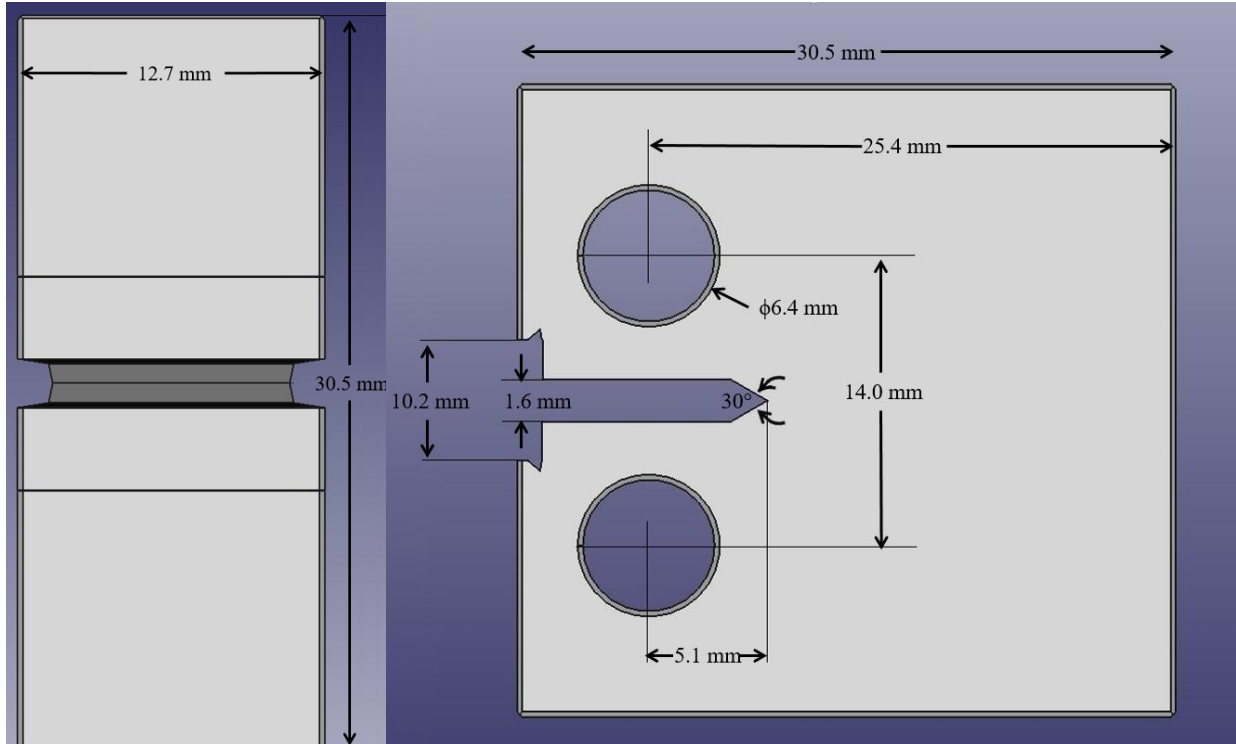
ASTM E647-15 Annex A1 and ASTM E399-20 Annex A4 non-compliant CAD drawing for 12 mm thick specimens [31, 33]
